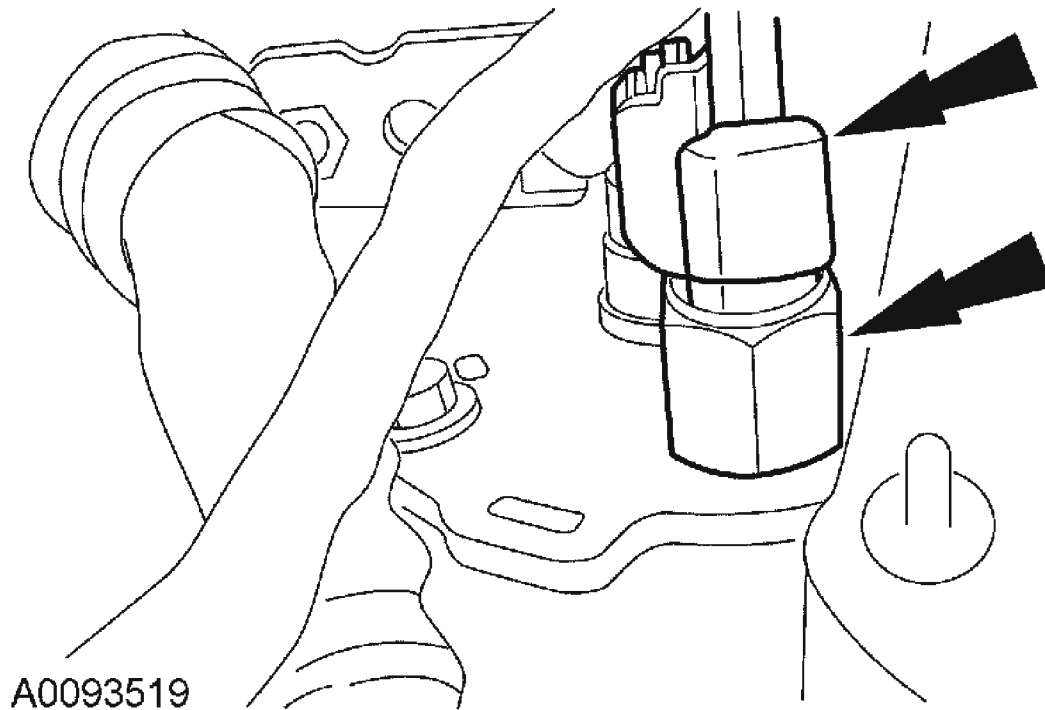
Disconnecting Electrical Connector And Removing Reversing Lamp Switch
